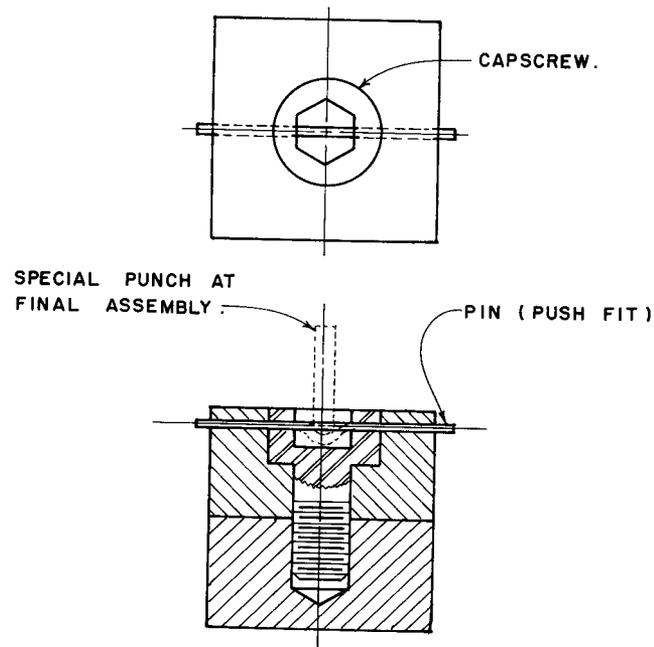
Class-A Push-Fit Pin for Recessed Head Cap Screw.
